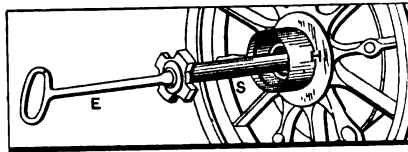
Showing how the jackshafts can be withdrawn from a full floating axle and the style of tool used for the purpose
